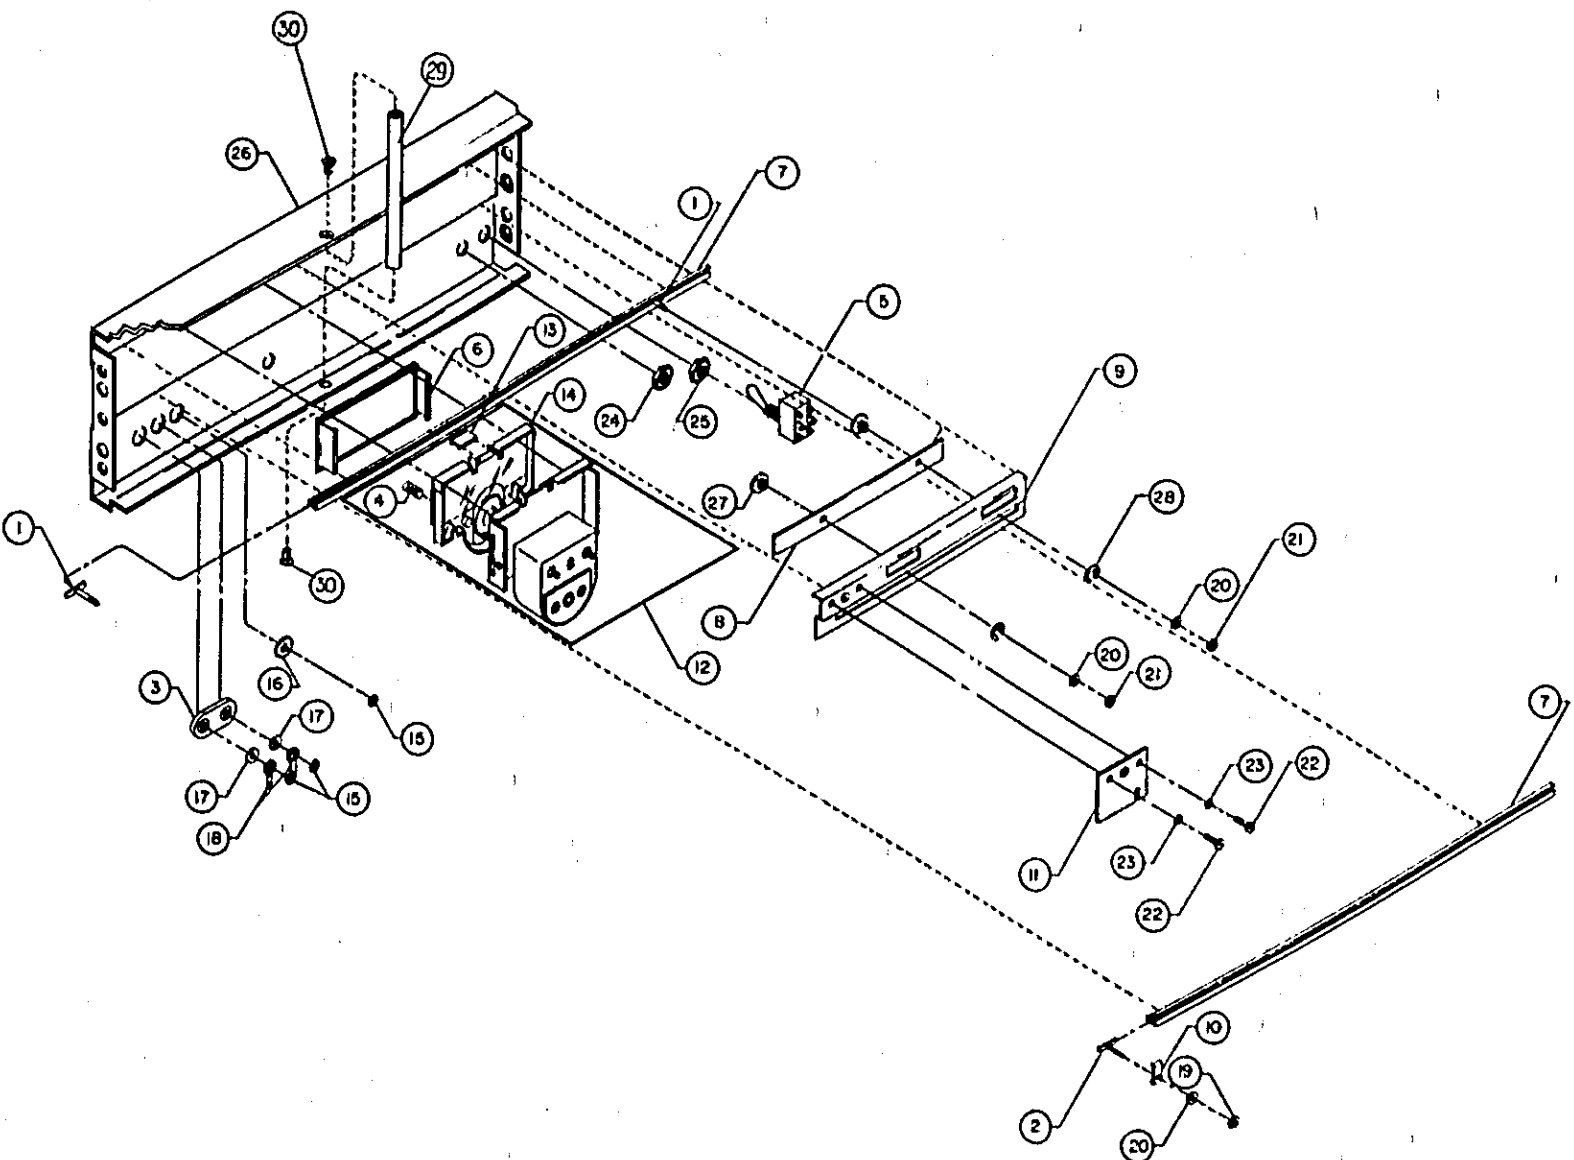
Exploded View of Front Panel Assembly (II) (Sheet 1 of 2)
